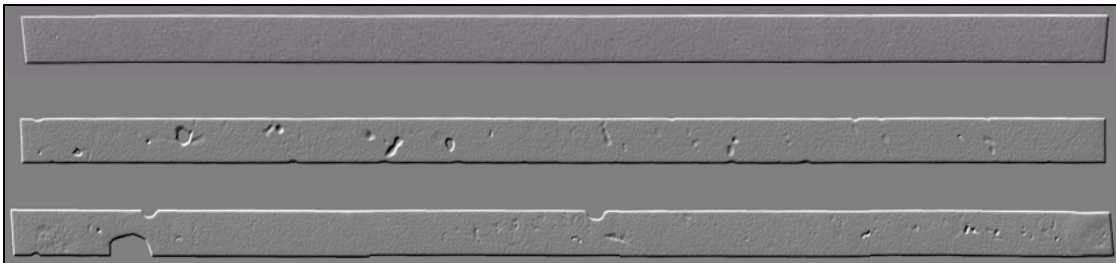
X-Ray Inspection of Solder Test Specimens (Good and Bad Samples).
